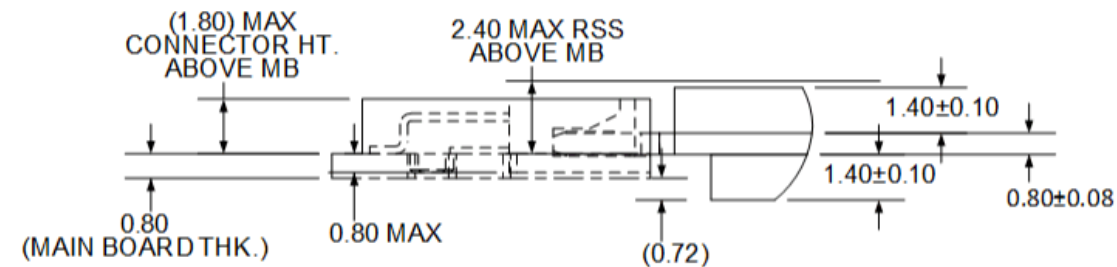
Stack-up Mid-mount (In-line) Double-sided (D5) Add-in Card Module for 1.5 Maximum Top-side and Bottom-side Component Height
